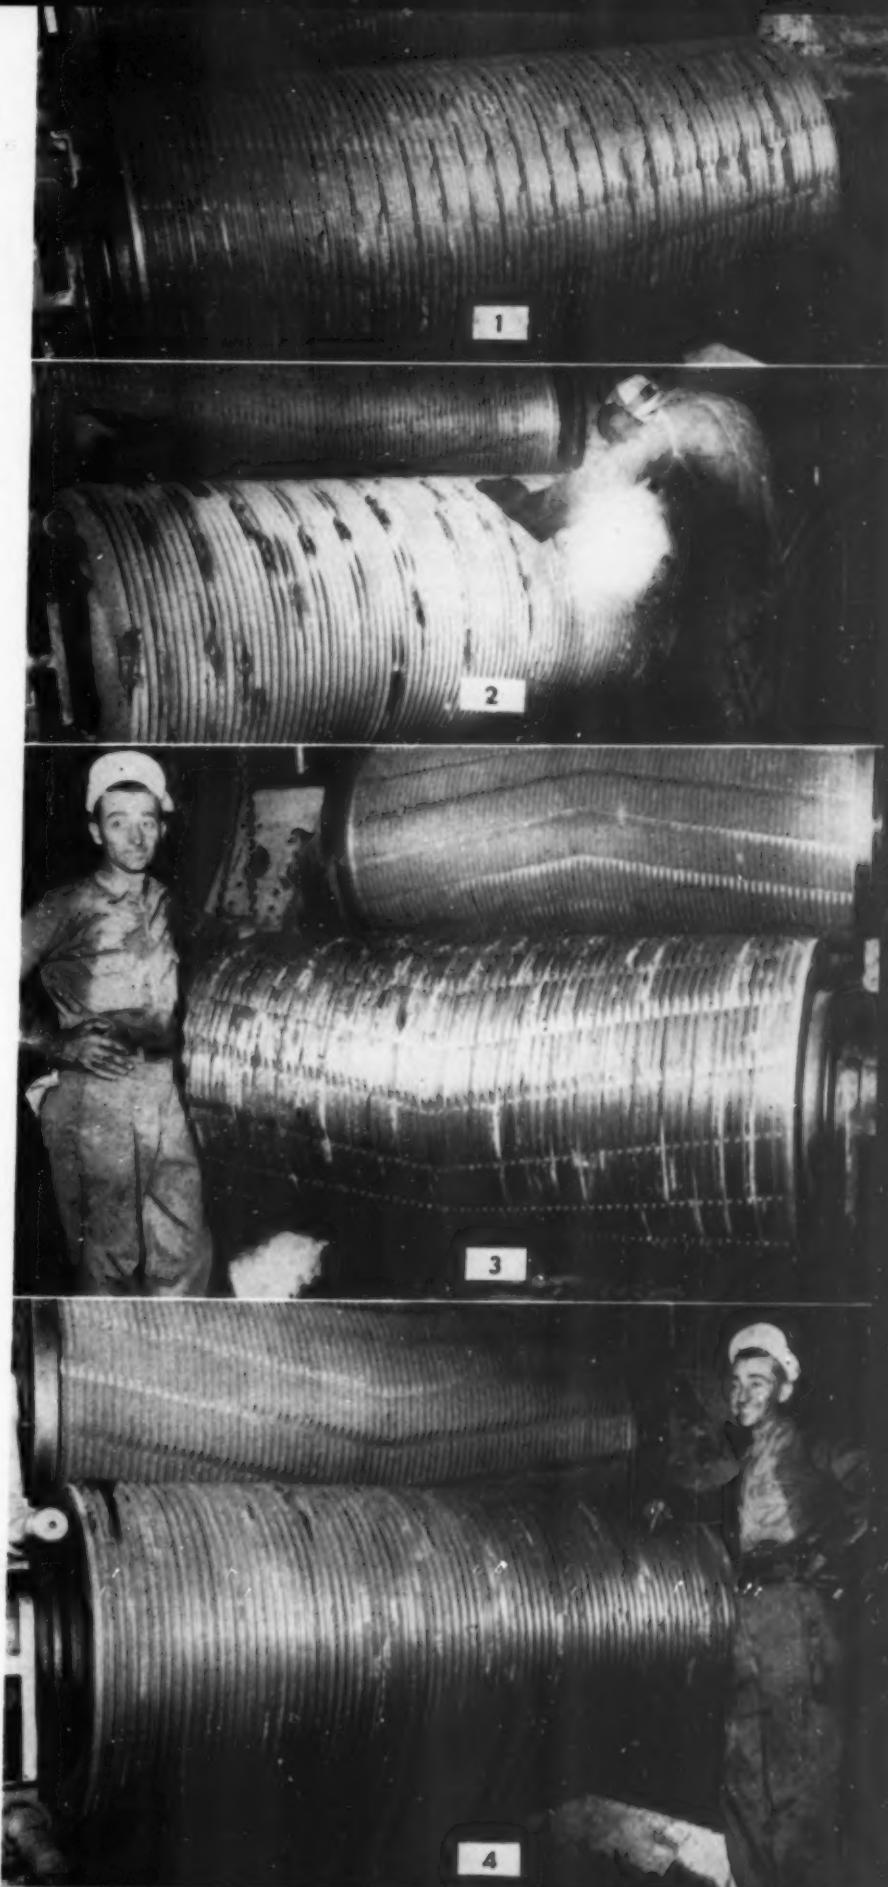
The bottom roller is being welded with Xylon 2-24, an electrode especially formulated to operate at extremely low amperages upon cast iron. The top roller has been welded and machined.
